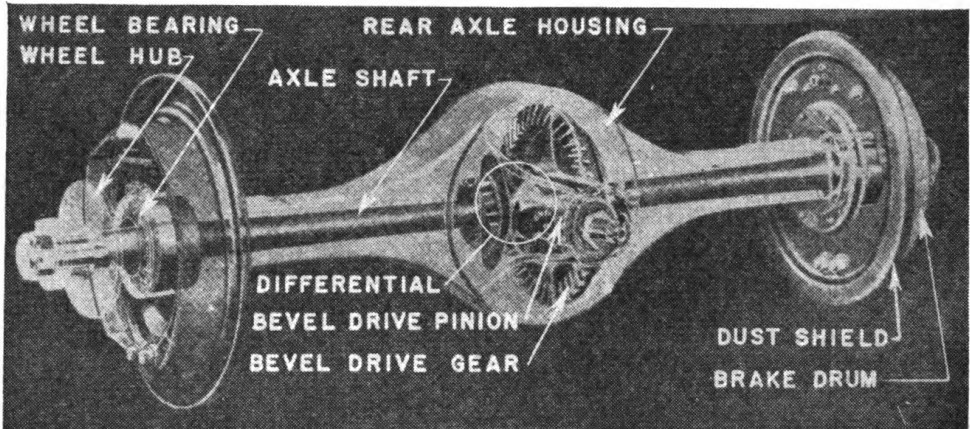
Phantom view of live rear axle with axle shafts and differential assembly in darker color.
